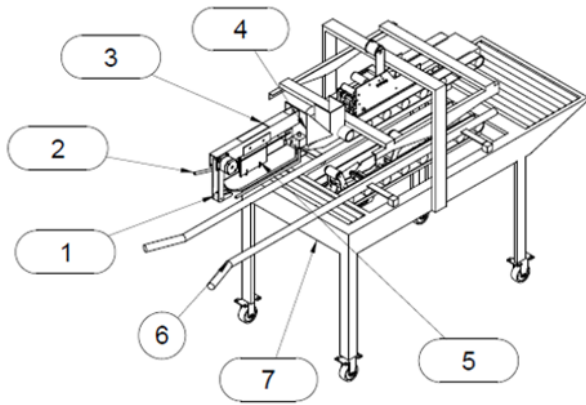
MH-FJ-1D with automatic folding flaps final design, with detail part (1) Folder arm, (2) Side guide, (3) Main block, (4) Connector support, (5) Top guide, (6) Extended guide bar, and (7) Removed front roller.
